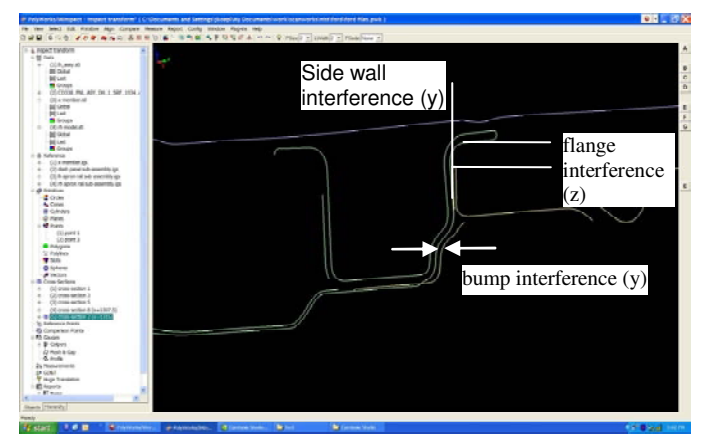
Enlargement of Cross Section of Left Hand Rail and Crossmember
